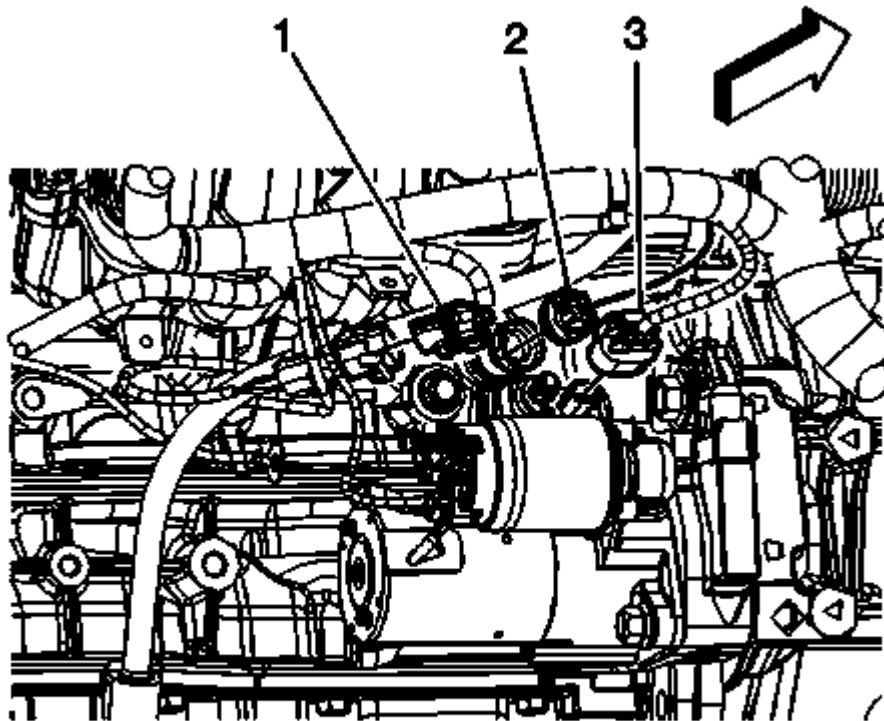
Identifying Engine Oil Pressure Sensor, Knock Sensor & CKP Sensor Electrical Connectors
